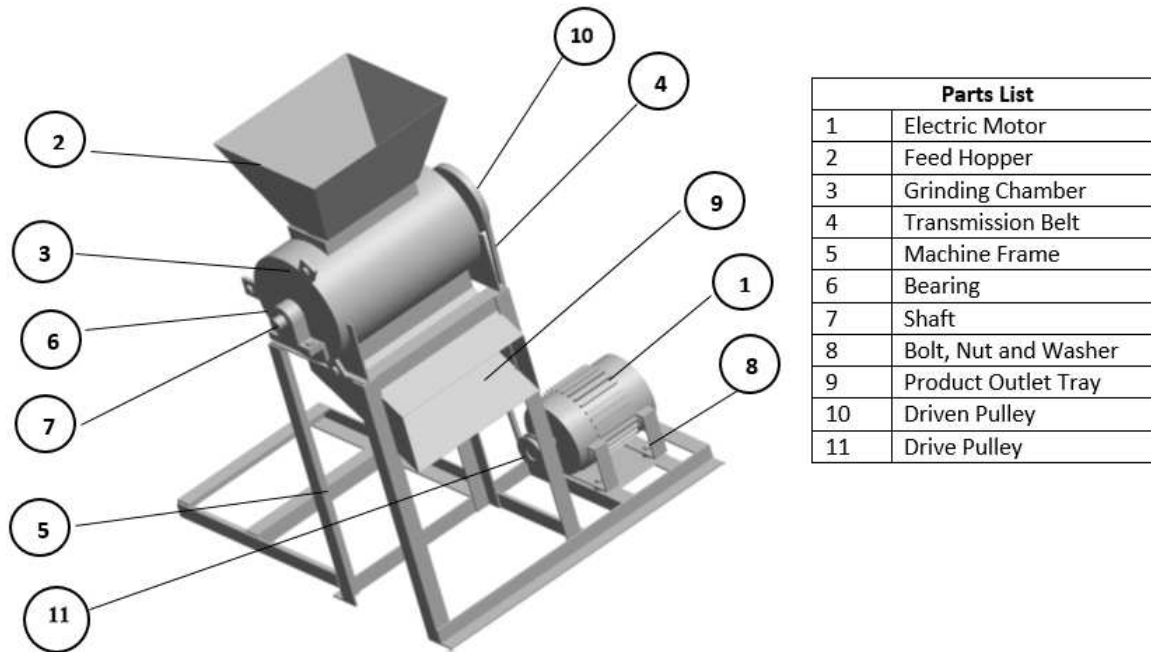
Isometric view of the Multi-Purpose Crushing Machine
